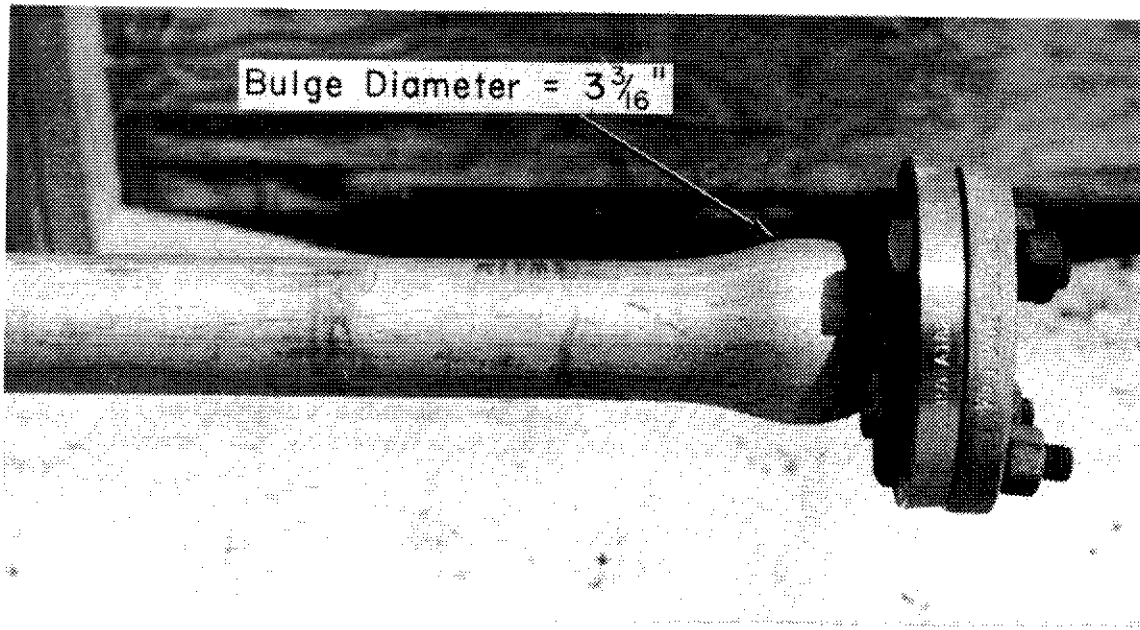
Damaged 2-inch Pipe After 12-atm Test
